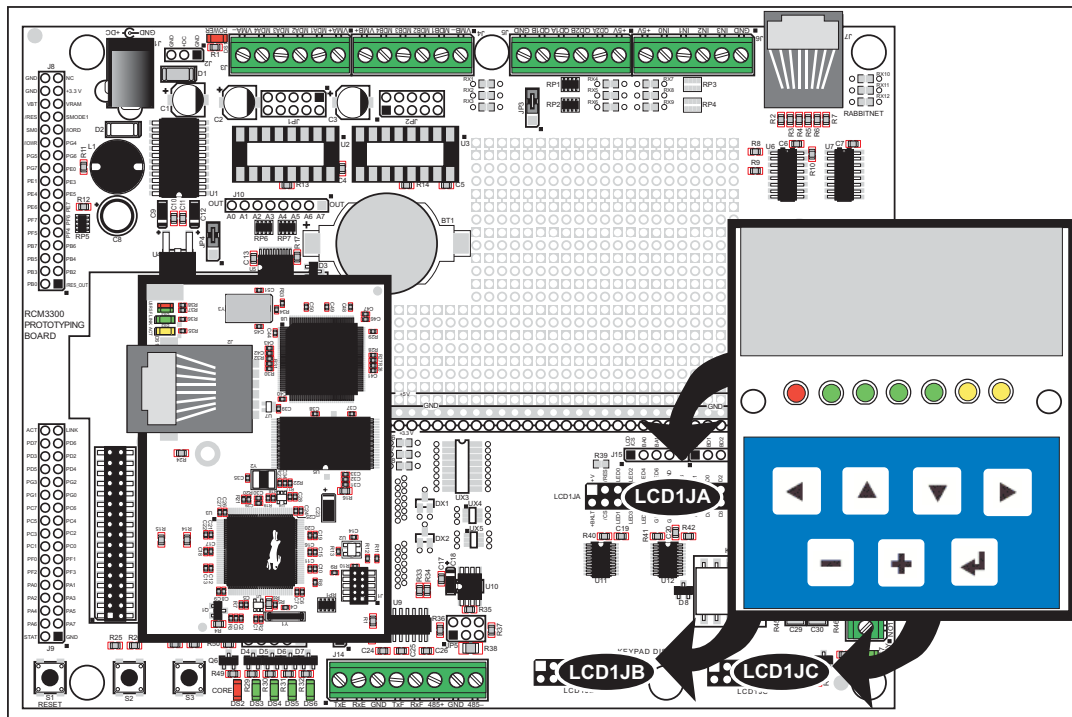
Install LCD/Keypad Module on Prototyping Board
